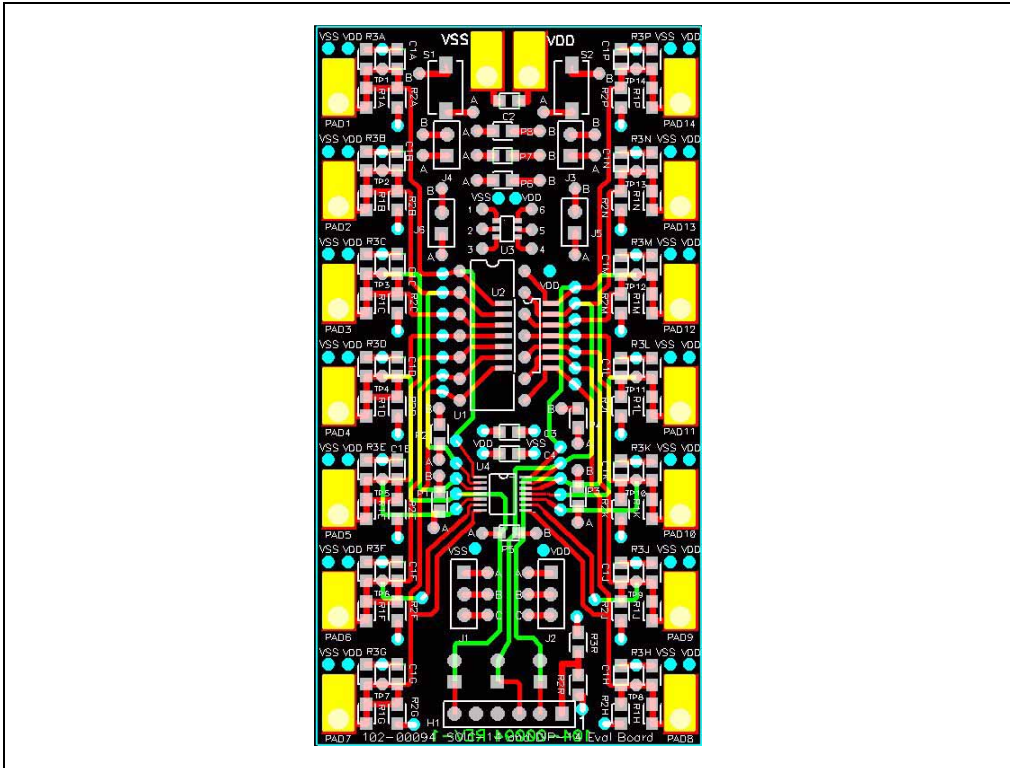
Board Layout – Top Layer + Bottom Layer + Silk-Screen.
